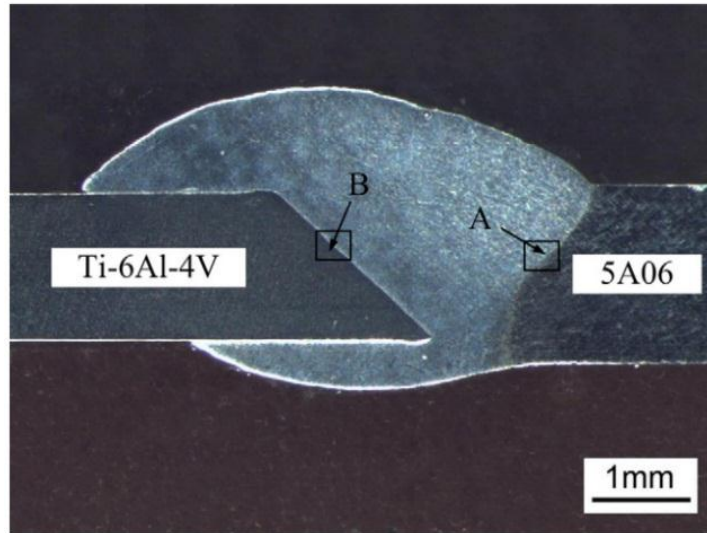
Cross-section of a typical Al-Ti weld produced by laser brazing [3].
